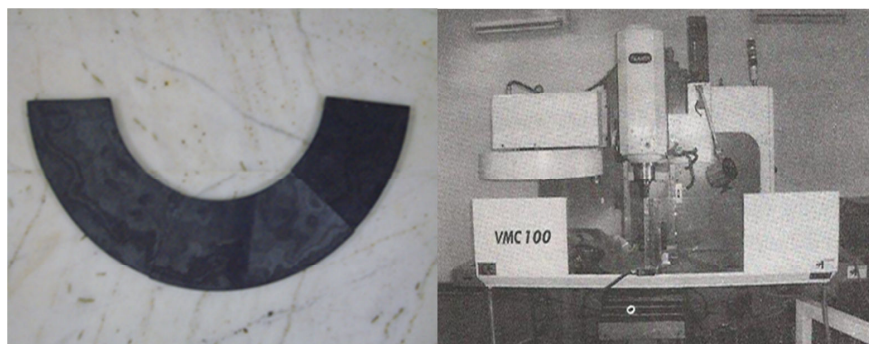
C-C composite material Fig.3 Vertical Machining Centre100
